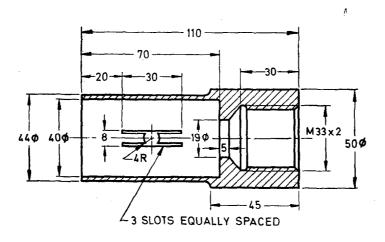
DIMENSIONS FOR OUTER CASING END FITTING (NEEDLE END) FOR TYPE A FLEXIBLE SHAFT ASSEMBLY
